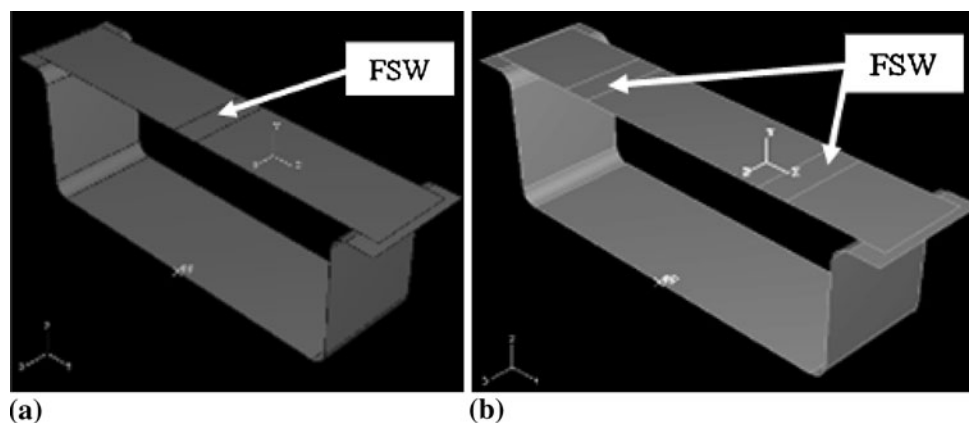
Typical FEA models with various FSP locations. (a, left) Weld centered in forming blank and (b, right) welds placed to control thickness in corner of formed parts
